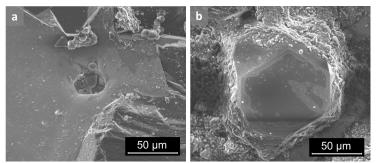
Details of diamond coated tools after milling (a) diamond pull out, (b) adhesion phenomenon [28].
